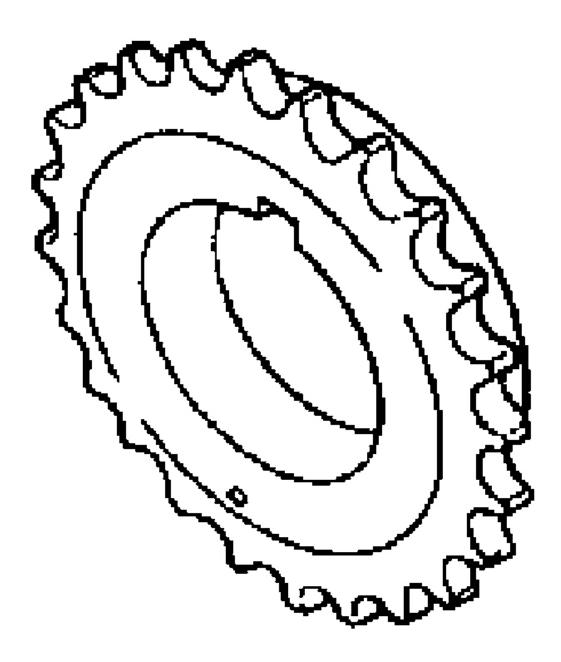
Identifying Crankshaft Timing Sprocket Teeth Courtesy of SUZUKI OF AMERICA CORP.
